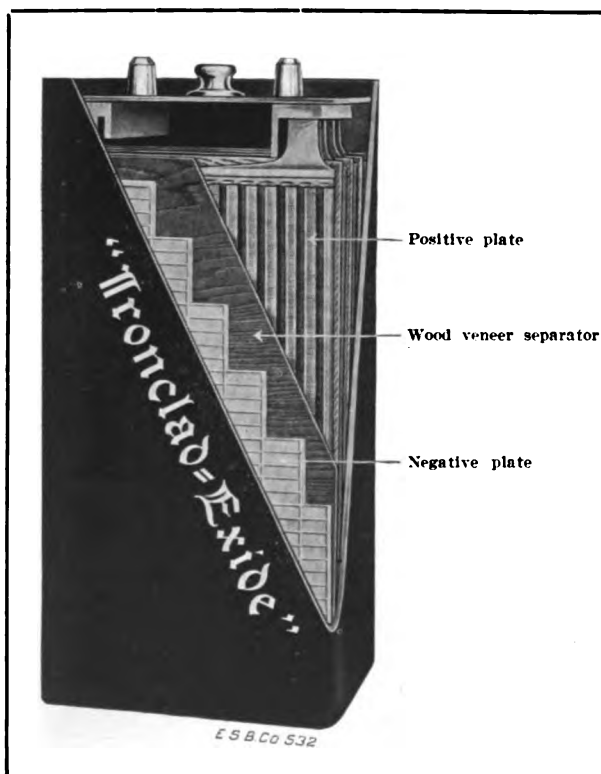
"Ironclad-Exide" Cell, Cut Away to Show Assembly.
